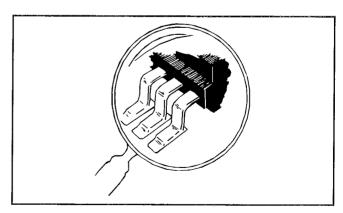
Use a strong magnifying glas to make sure there are no short/circuits or unsoldered leads.
